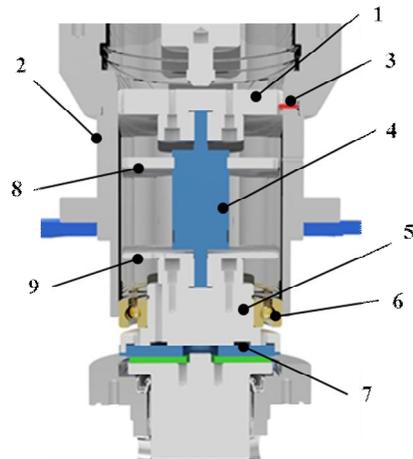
Torque damper for the non-rotating test components with friction force measurement system.
